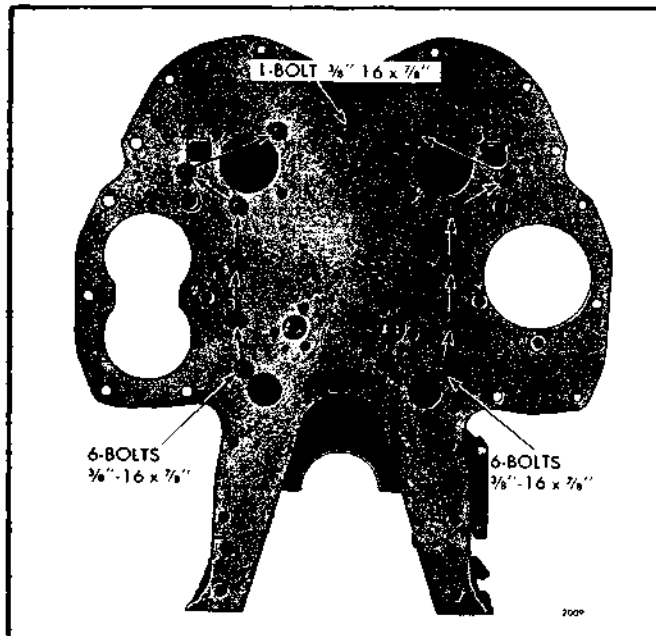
Cylinder Block Rear End Plate Mounting (In-Line Engine)
